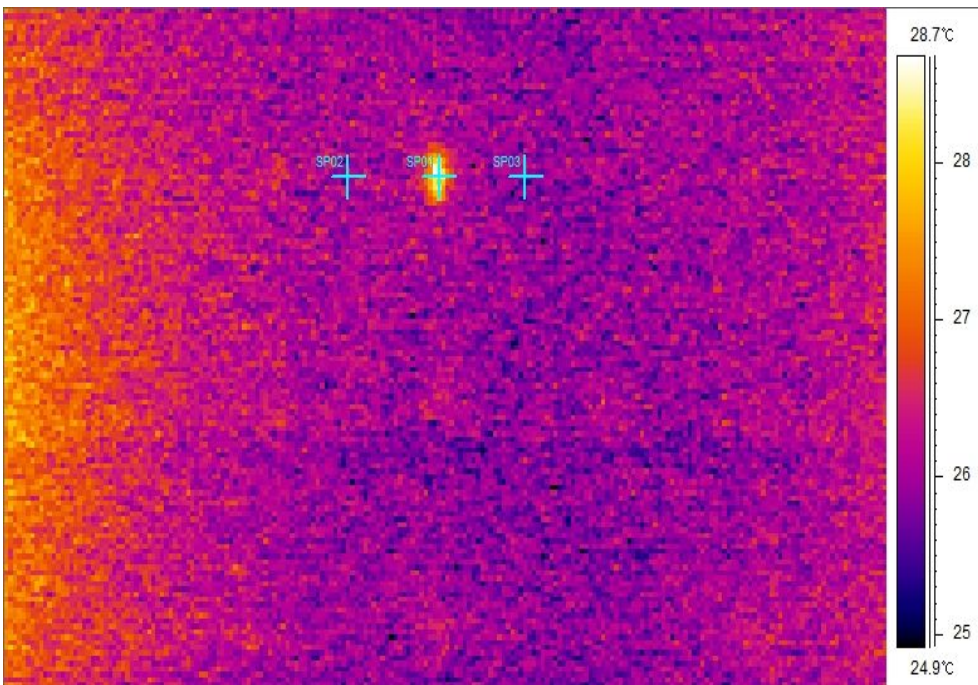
IR test image for the flange: 5mm surface defect
